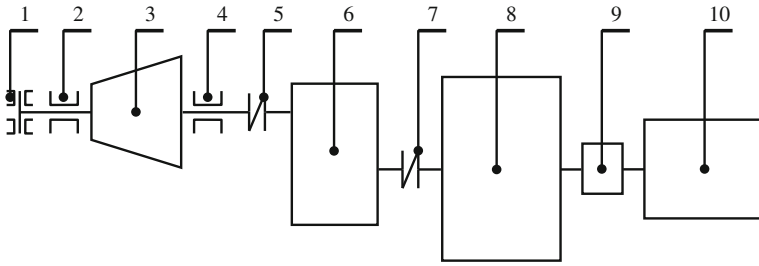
Configuration scheme of the solution variant 1 (high speed gearbox and planetary gearbox). 1, 2, 4 bearings; 3 turbine; 5, 7 elastic couplings; 6 high speed gearbox; 8 planetary gearbox; 9 gear coupling; 10 electric generator
